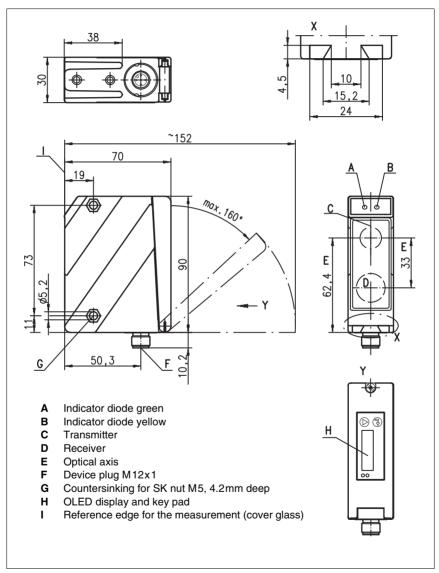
Dimensioned drawing ODS 96B..., ODSR 96B...
